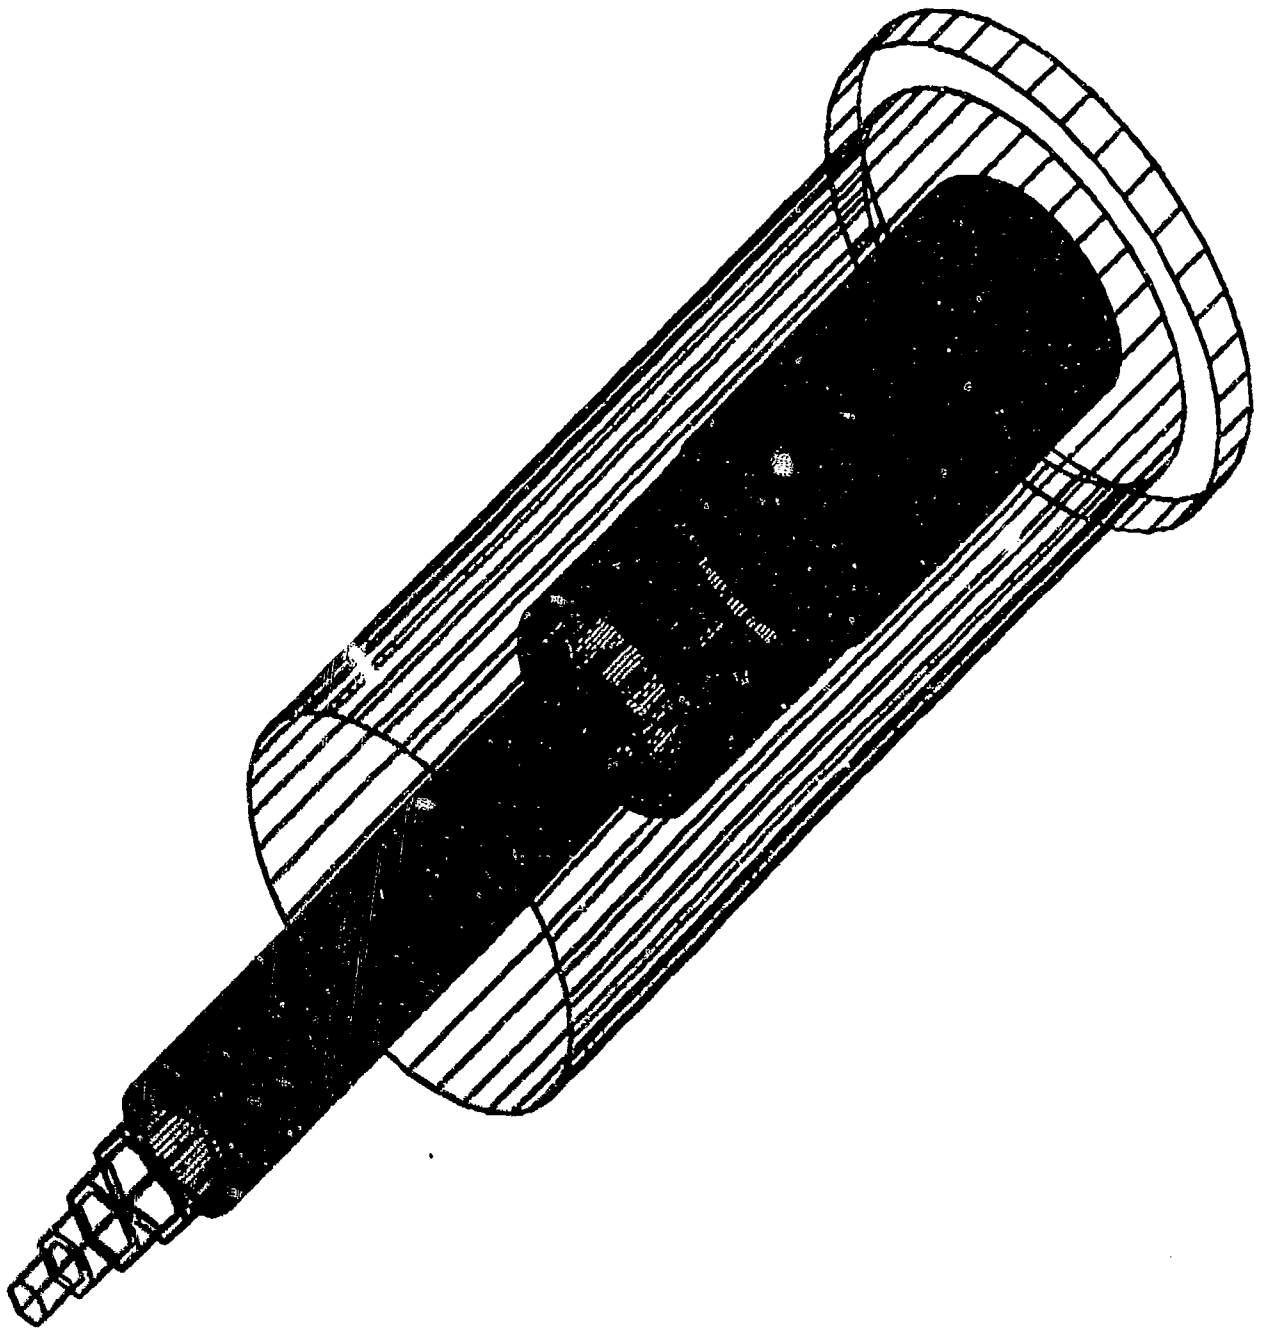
TOOLING FOR SOCKET HEAD CAP SCREWS
